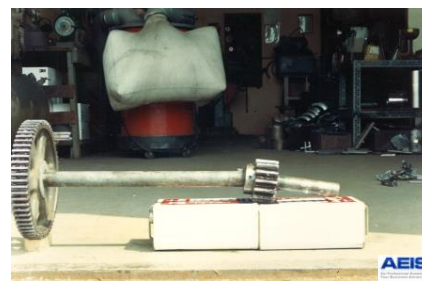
Bent and fractured drive shaft after removal from the unit
